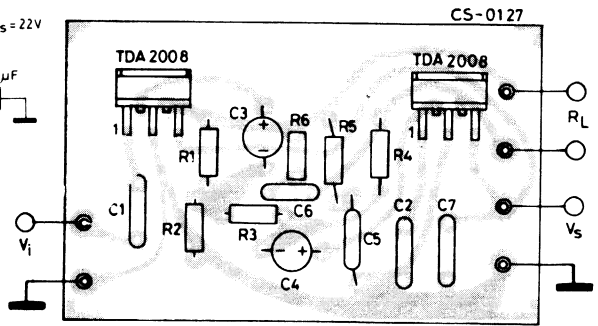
P.C. board and component layout for the circuit of fig. 3 (1:1 scale)
